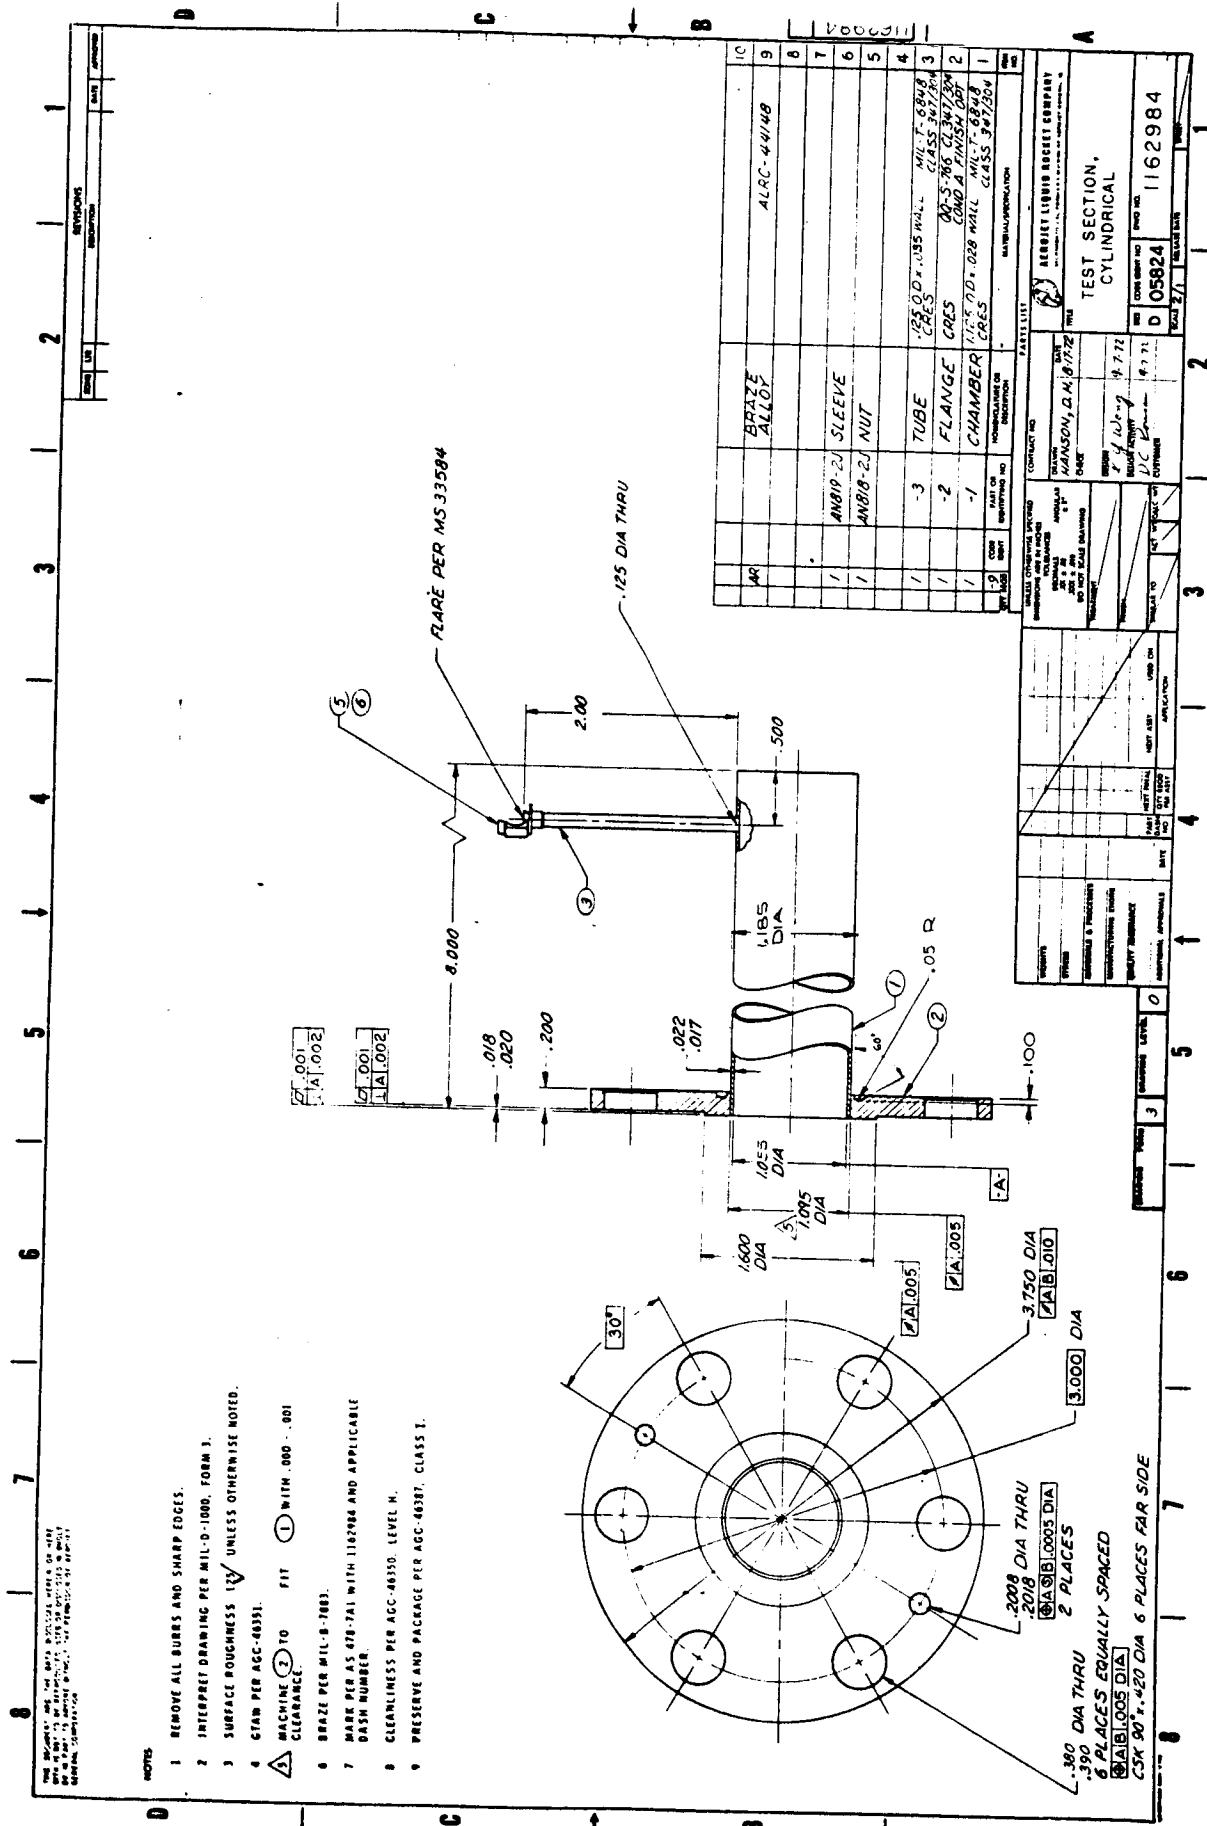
CYLINDRICAL SUPERSONIC TEST SECTION DESIGN
